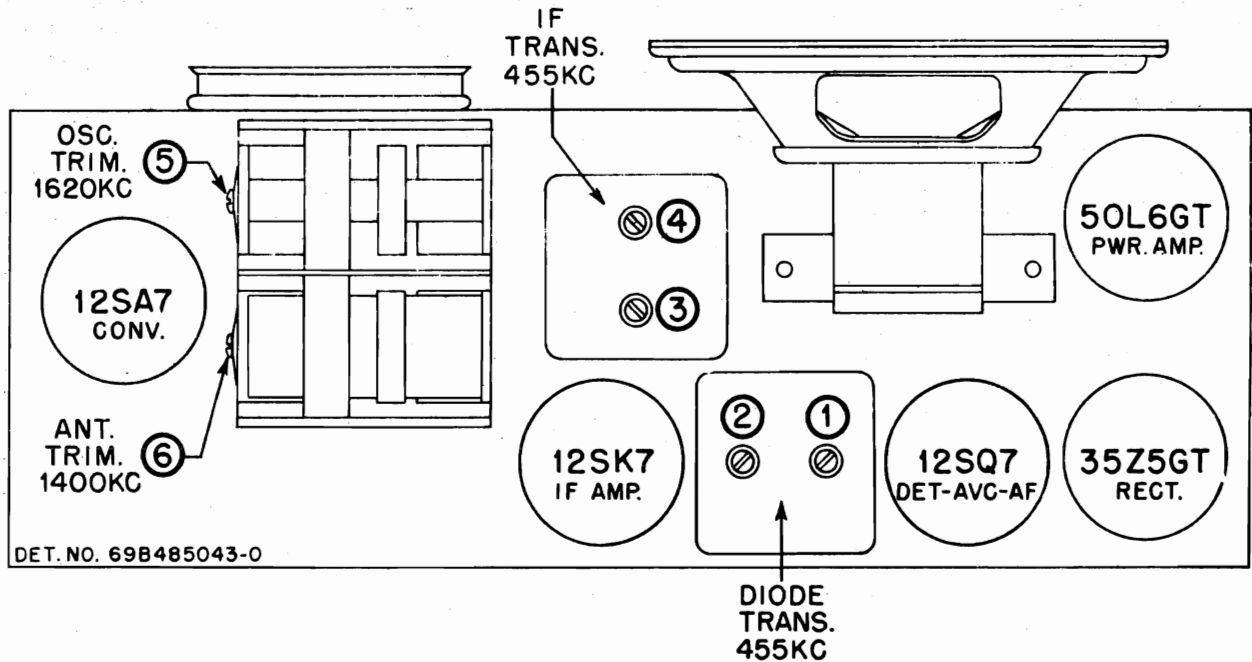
CHASSIS HS-158 TUBE & TRIMMER LOCATIONS
